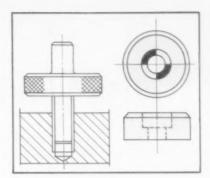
Among possible designs of locating blocks are those made separately and fastened to the fixture (above), and others which can be welded to the fixture, with the locating surface machined.
